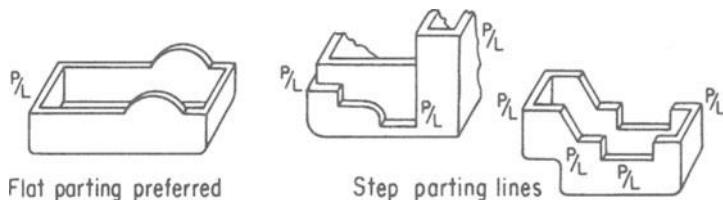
Consider the parting lines when designing parts that may require odd or different radii, contours, and stepped parting lines.
